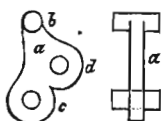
Mainspring-swivel, full size. *a*, *a*, body; *b*, axis; *c*, tumbler-pin hole; *d*, finger-pivot hole.
